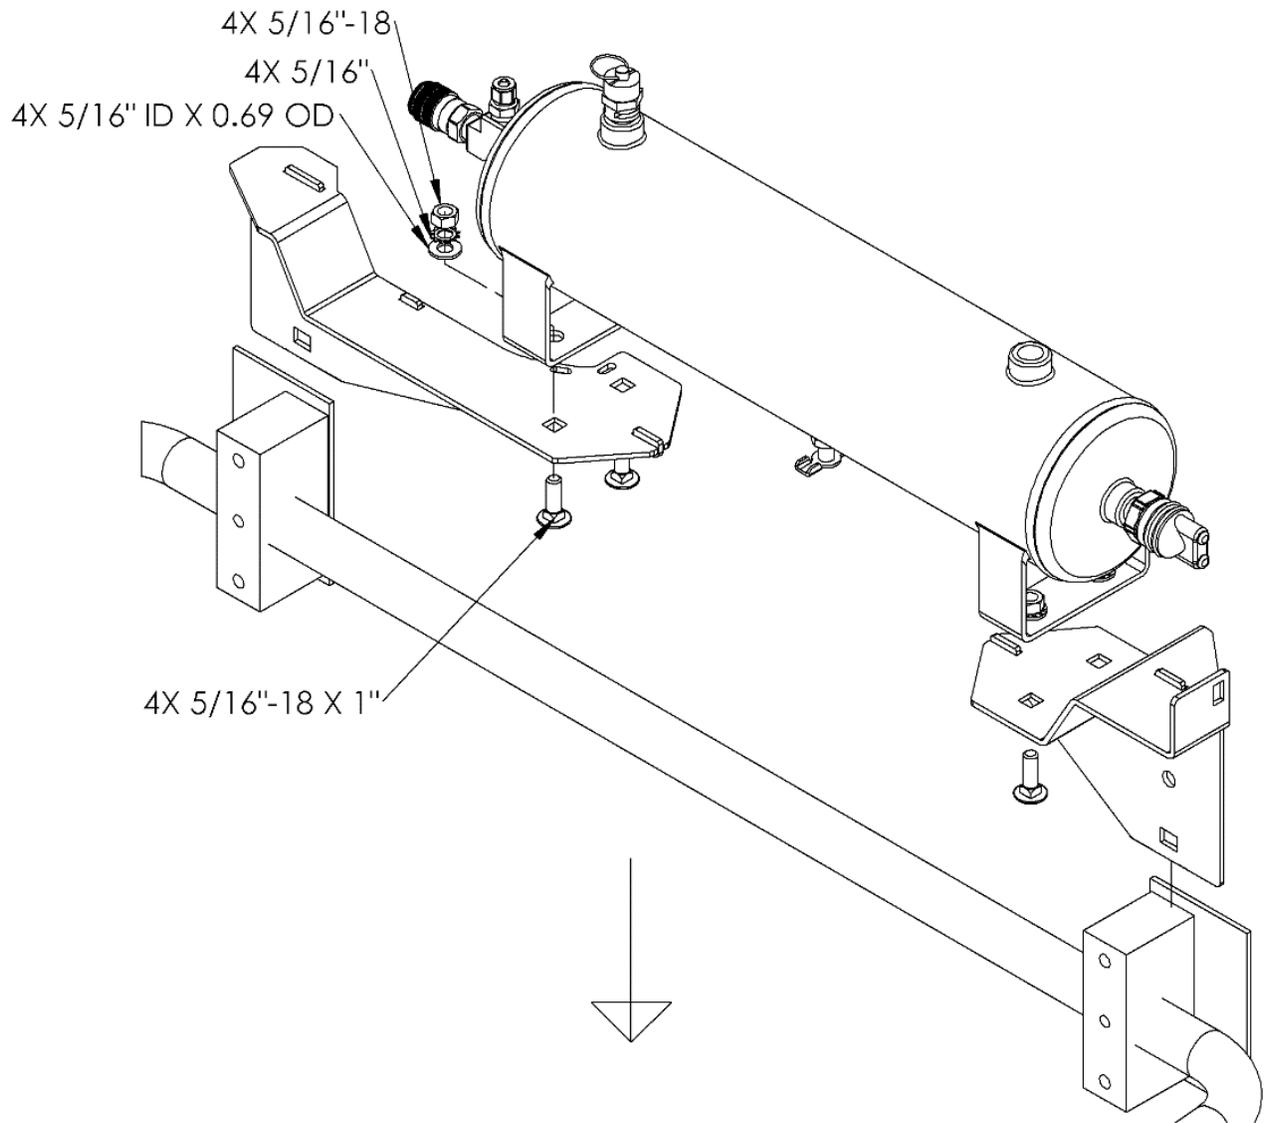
Air Tank and Air Tank Brackets Exploded View
